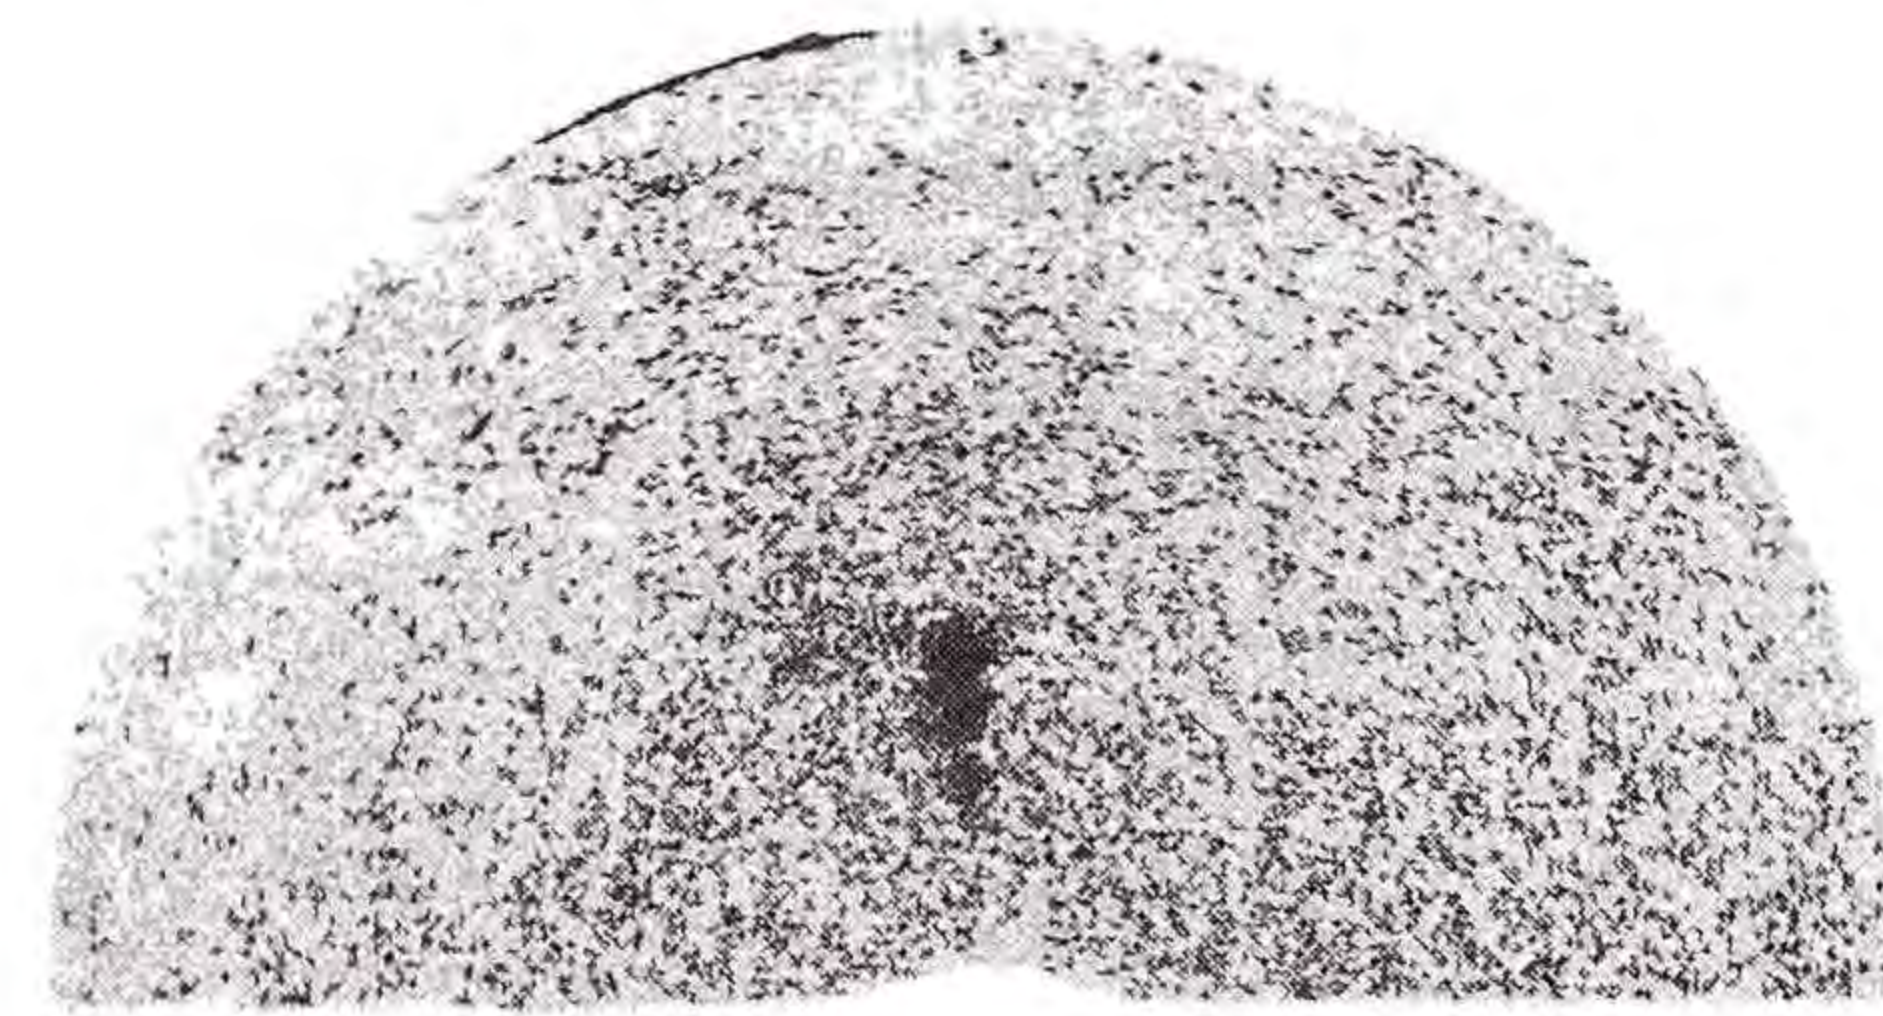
Soft X-ray photograph of the injection molded specimen with center gate.
